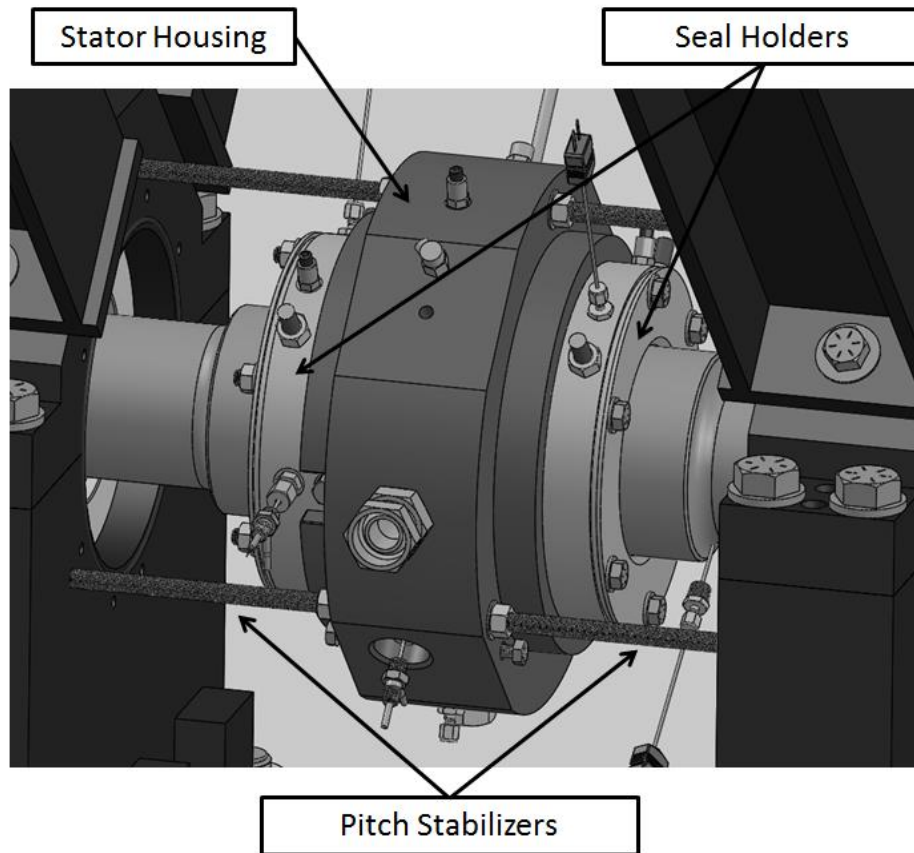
Isometric view of stator housing. Note: Collection chambers, drive end air buffer seals and Y Zonic were removed from the figure for viewing purposes
